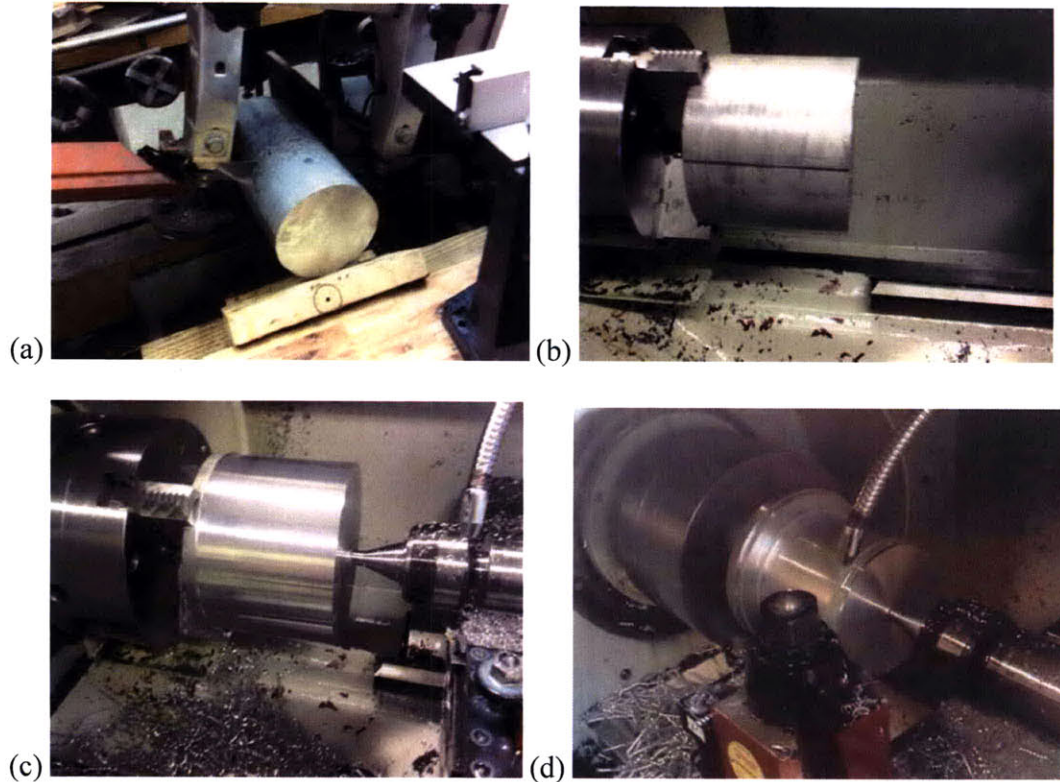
Machining processes performed in the wedding cake sample preparation (a) Cutting cylindrical rod stock in half on band saw (b) clamping cut stock in chuck of CNC lathe (c) stabilizing stock with centering tailstock quill (d) turning down the layers of the wedding cake sample
